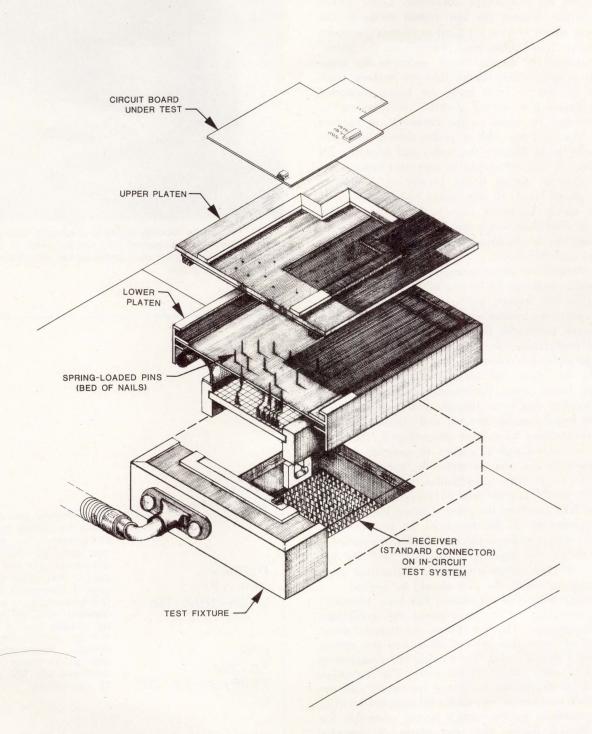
Test fixture, exploded view. Receiver or other standard connector joins test fixture to numbered test system nodes. Fixture pins contact circuit board nodes when vacuum is applied to test fixture
